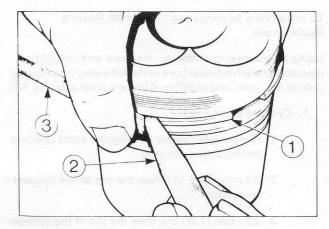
Taper Ring to Groove Clearance Check -Turbocharged Engines
